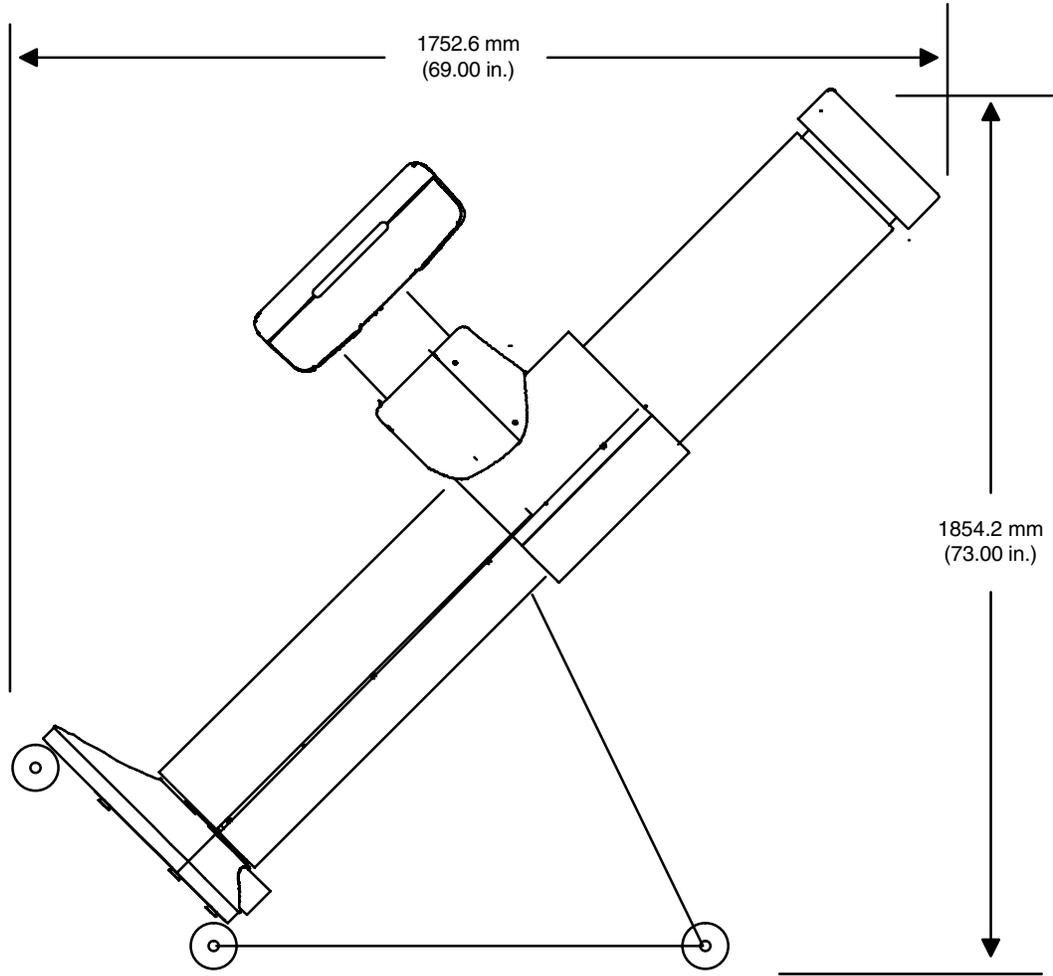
Wall Stand (Regular Arm Length) Site In-Transit Dimensions
